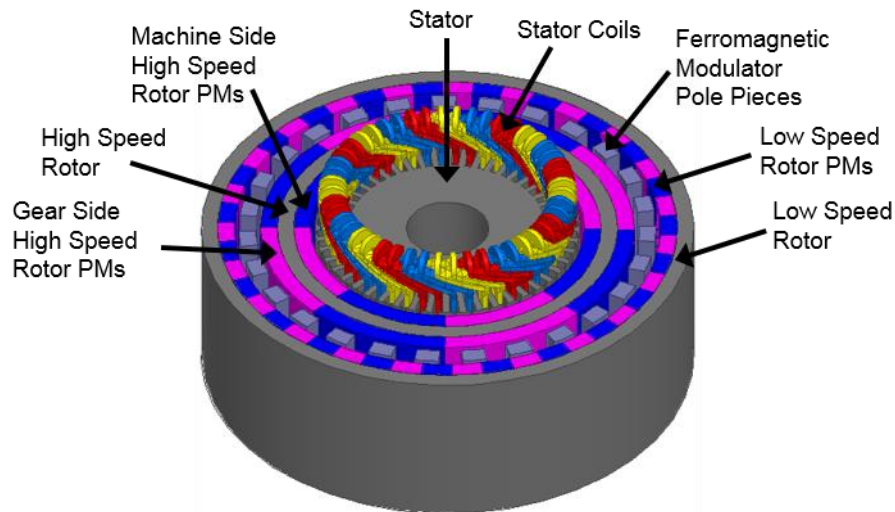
Magnetically Coupled Inner Stator Radial Flux Magnetically Geared Machine
